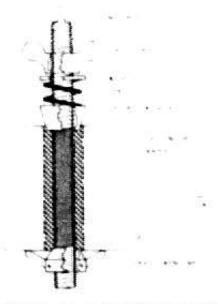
shows this scheme in actual application. The mounting and demounting was simple and fast. As a rod was pushed through a sasting hole, the spring compressed until the toggle wings emerged from the lower end and flipped open. The spring tension acting on the expanded wings fixed the rod vertically. The tapered washer and the machined taper on the toggle wing nut kept the rod centered in the hole. For removal, the rod was rotsted with a wrench at the notched flats at the upper tip of the rod. The toggle wings, which were inexpensive enough to be expendable, unscrewed and fell to the ground. The rod could then be pulled up and out of the hole.
